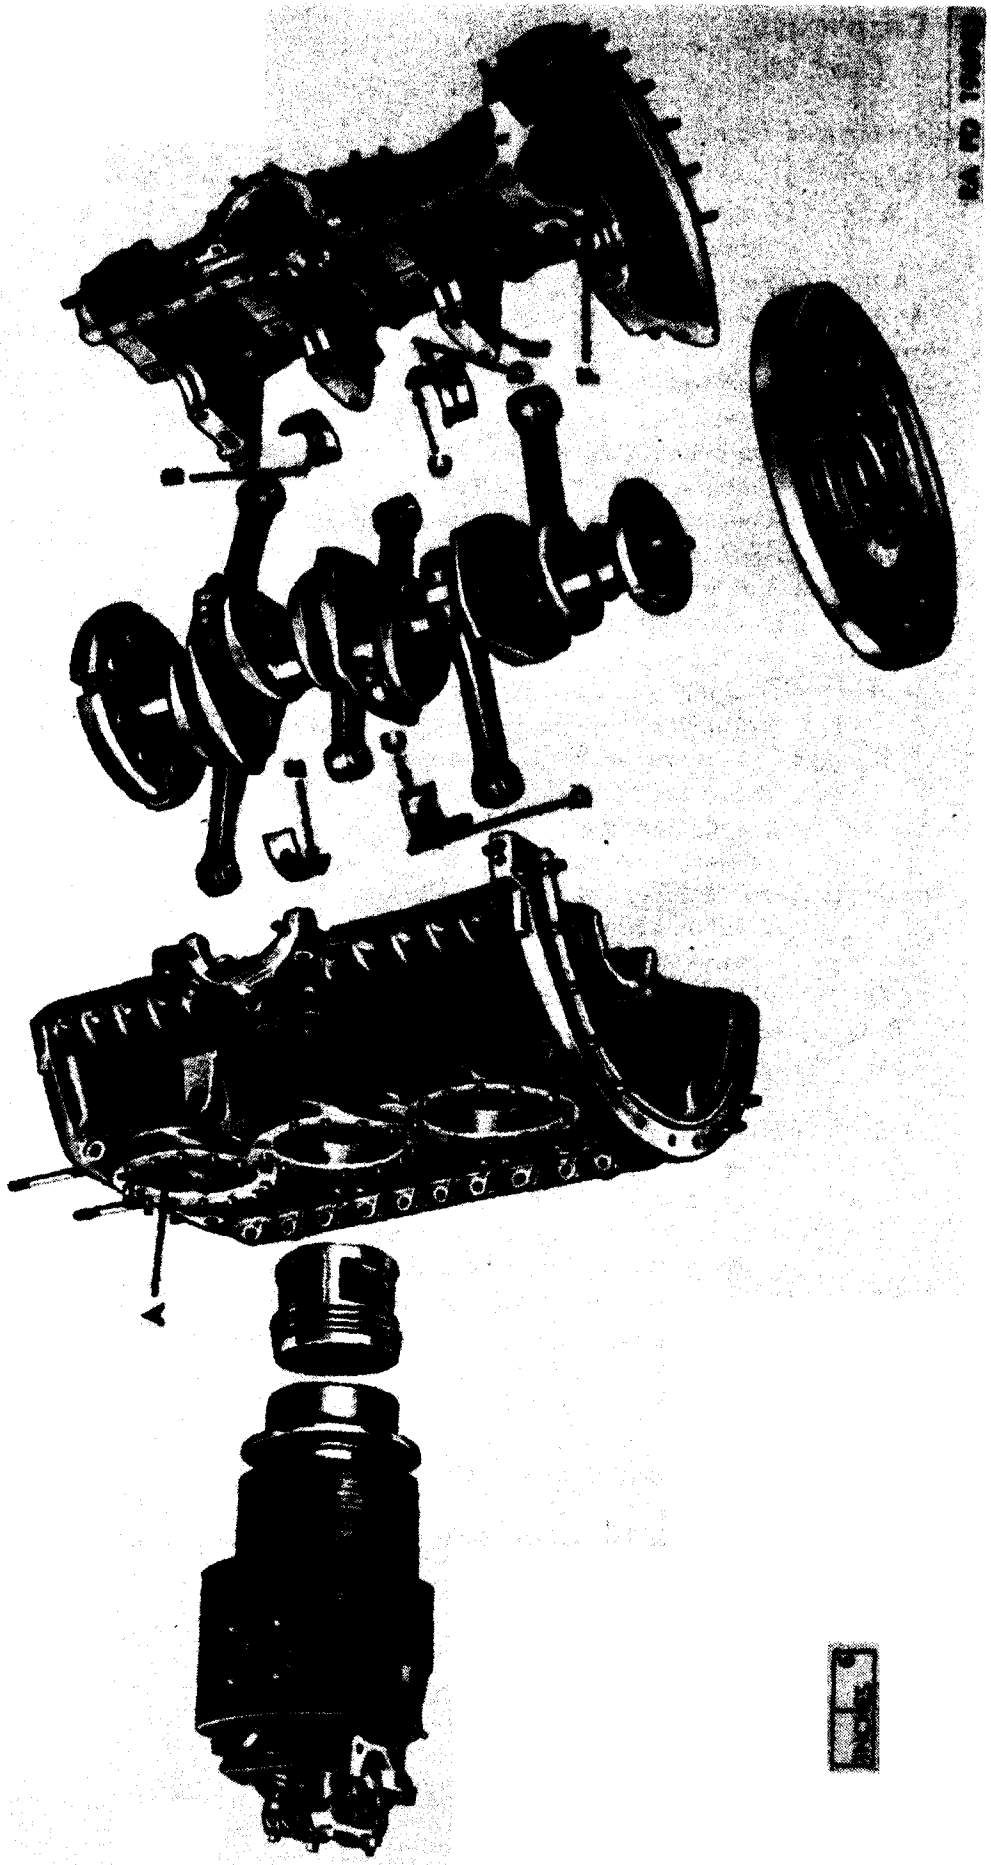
Repair and rebuild standard points of measurement for crankcase and crankshaft.
